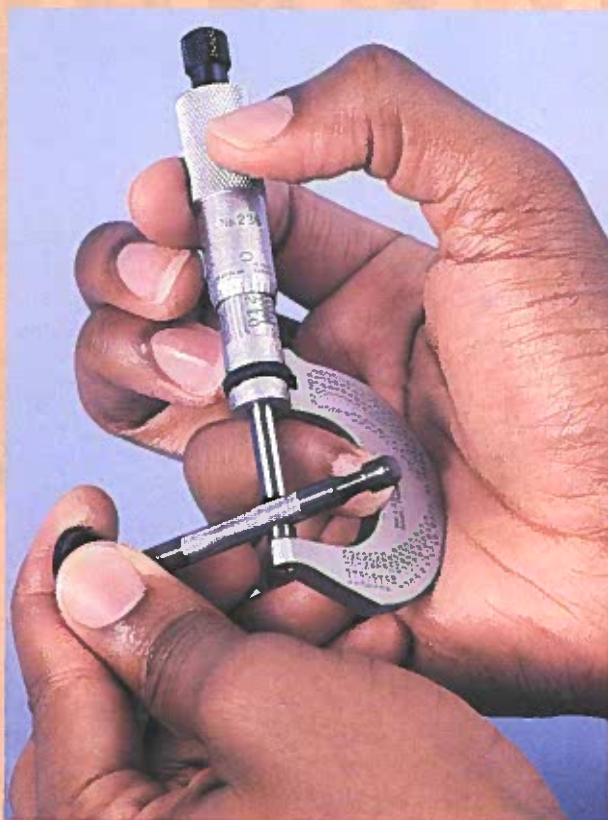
A. The proper way to hold a micrometer is to hold the micrometer in one hand, while holding the piece to be measured in the other hand. Rotating the ratchet at the end of the thimble will tighten the micrometer until it free-wheels. The measurement is then taken.
